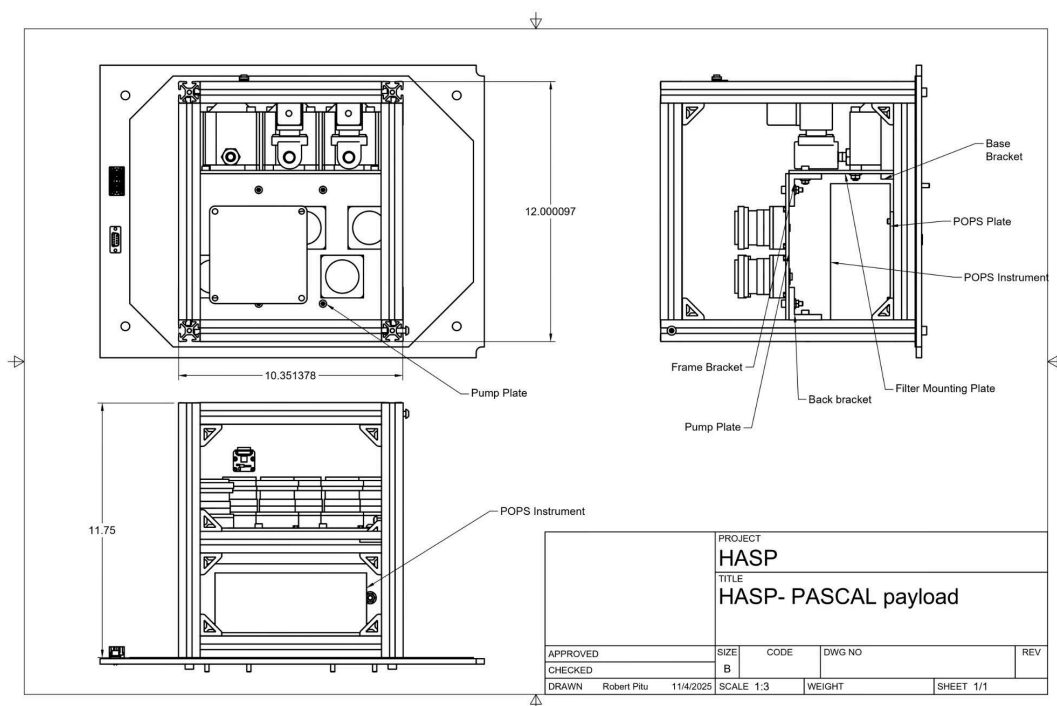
Top and side engineering drawings of the inside PASCAL payload
